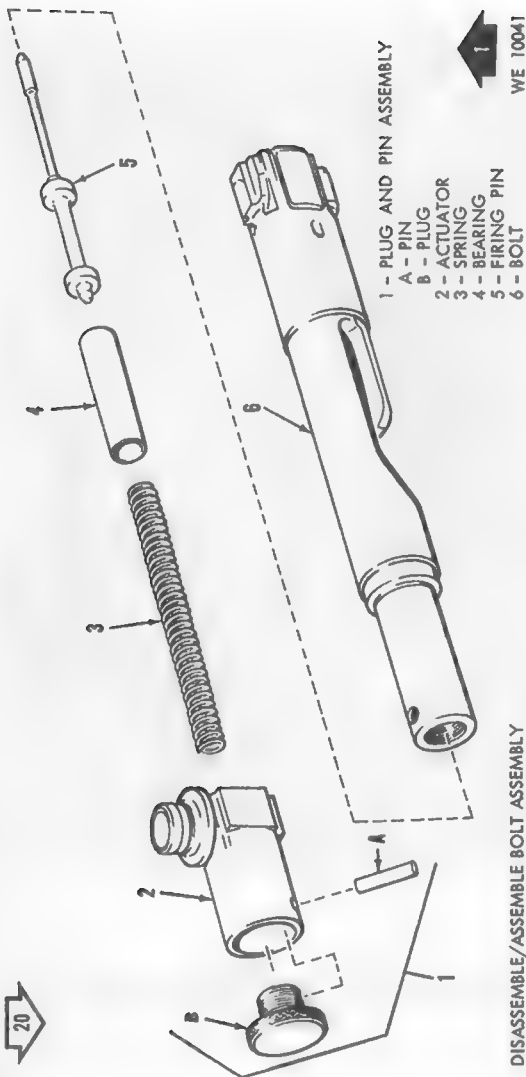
Disassembly/assembly of machine gun (sheet 7 of 7).
